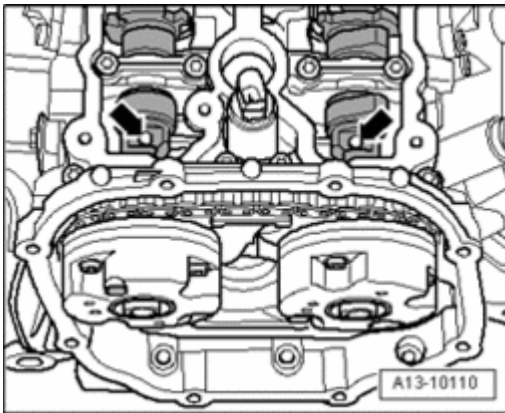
Identifying Threaded Holes In Camshafts Must Face Upward
